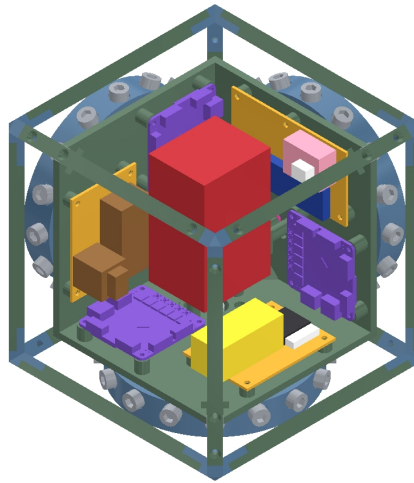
Configuration the tables below describe: an outer frame of edge rails and corner contact features enclosing the inner structure, the three orthogonal reaction-wheel modules and the electronics. The dimensioned general-assembly drawing is Figure 20.
